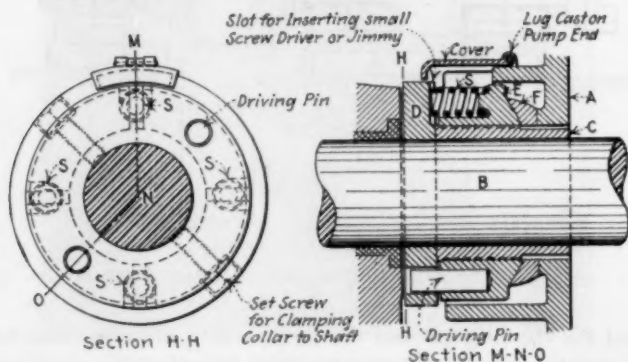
WATER JOINT USED ON ROTARY PUMP SHAFTS, TYPE B, AS SUBSTITUTE FOR STUFFING BOX
